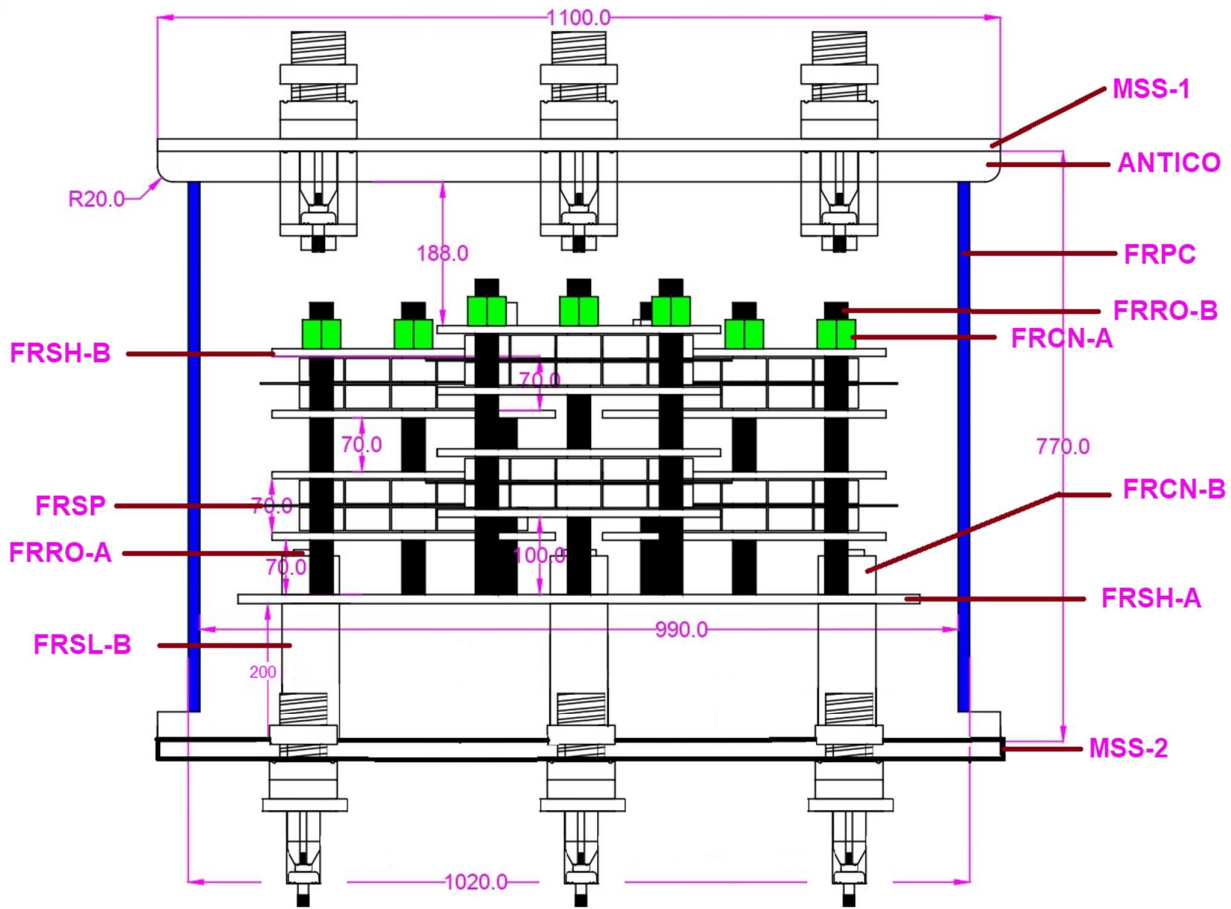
Front Cross sectional view of FWVM Unit Assembly
